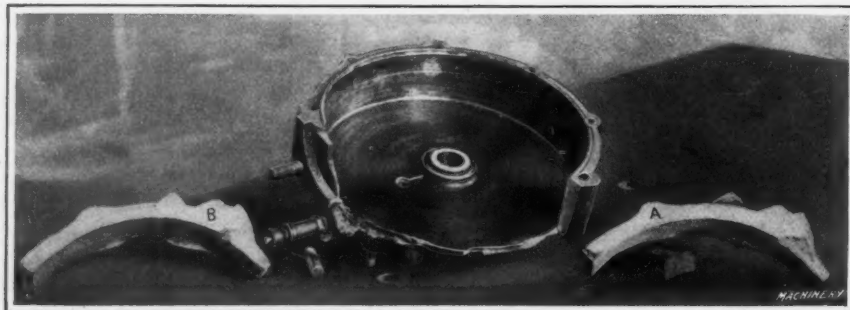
Aluminum Crank-case, Defective Part used for Pattern and New Part cast from Pattern
